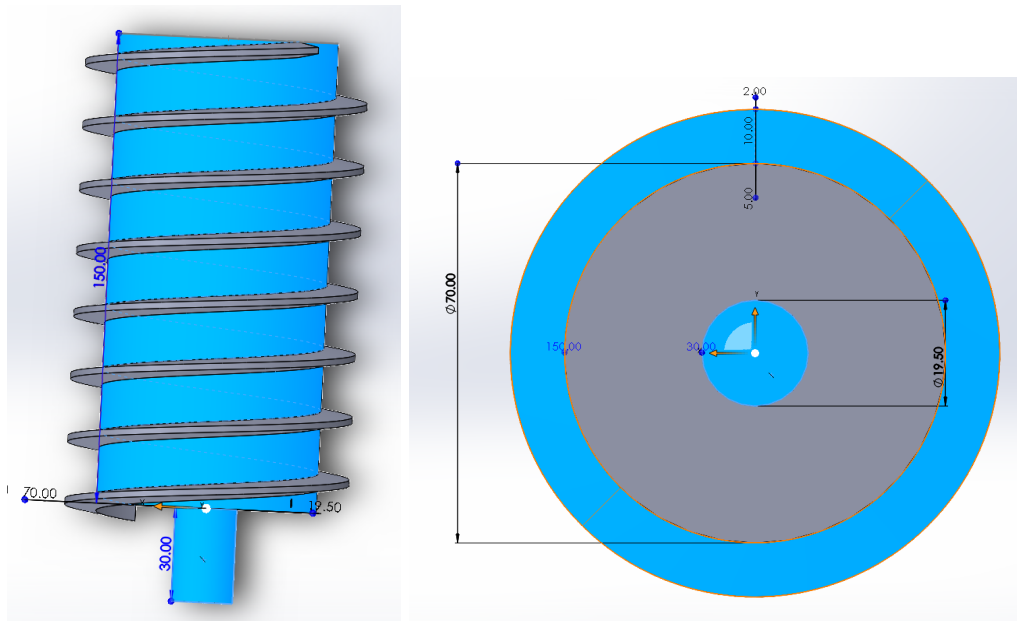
Helical Gear Connected to Gear Motor for the Vertical Movement of the Baskets
